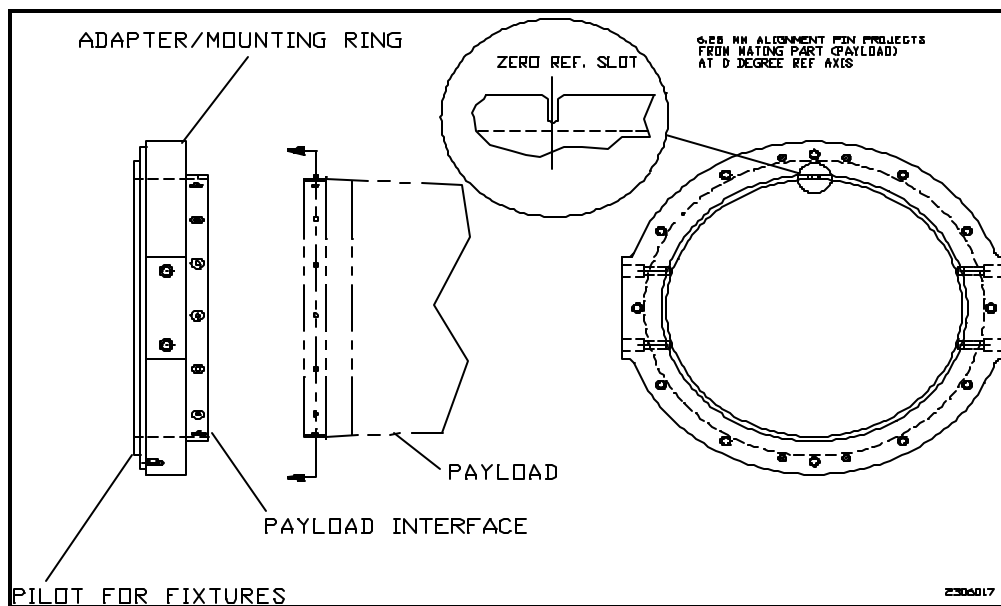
Adapter/Mounting Ring Fixture Simulates the Actual Attachment Surface
